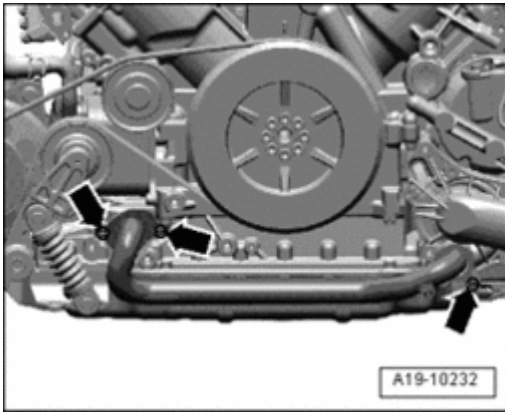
Removing Bolts, Front Coolant Pipe At Engine And At Coolant Pump
